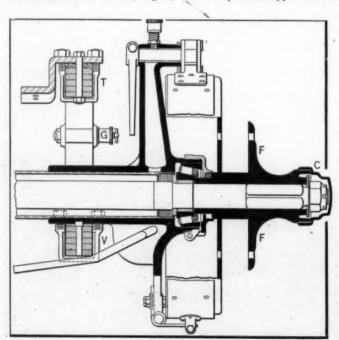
Section through wheel hub and axle showing brake and spring supports
